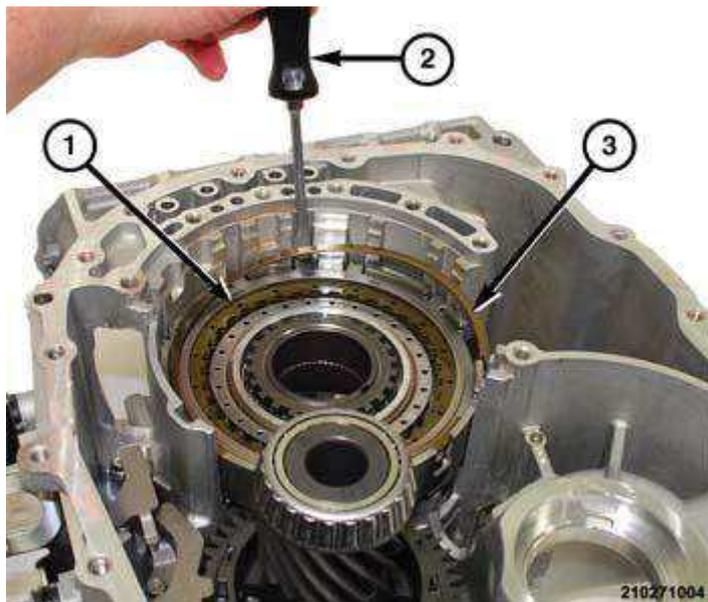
Underdrive Brake, Underdrive Brake Drum, & Large Snap Ring
